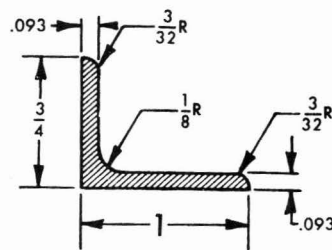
(Sheet 11 of 21) — Extrusion Charts
